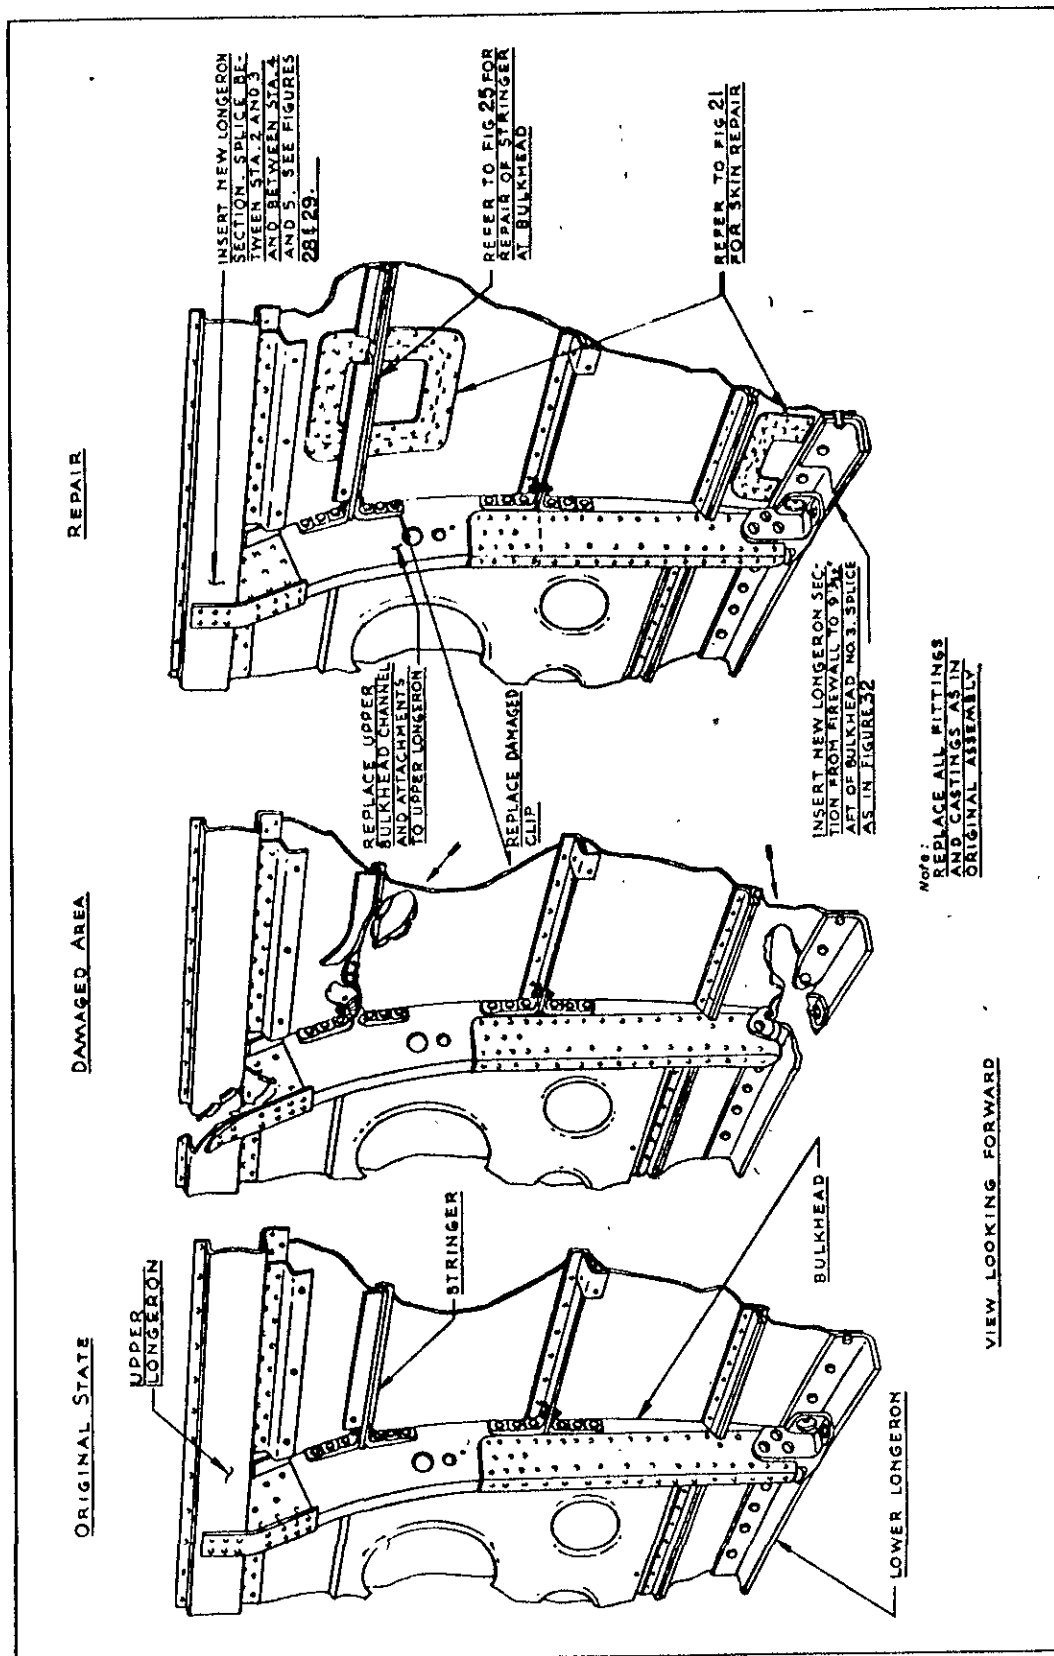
Fuselage - Stringer, Bulkhead and Longeron Damage Sta No. 3
